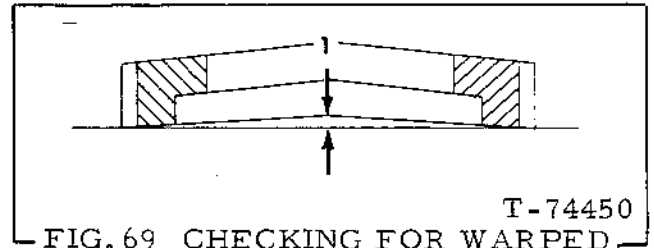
CHECKING FOR WARPED FLANGE HALVES
